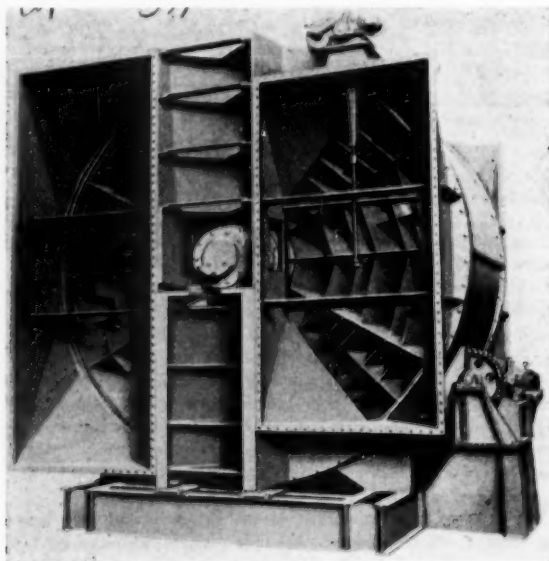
SHOP ASSEMBLY OF TYPICAL HORIZONTAL HEATER OF LARGE SIZE
